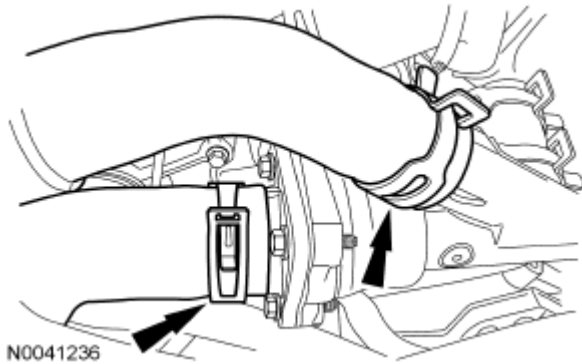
Locating Upper And Lower Radiator Hoses From Thermostat Housing
